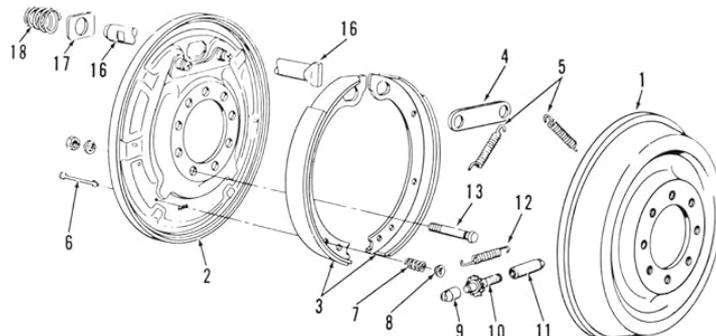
Exploded view of brake assembly for Models 2310, 2600, 2610, 3600 and 3610. Refer also to Fig. 212.
